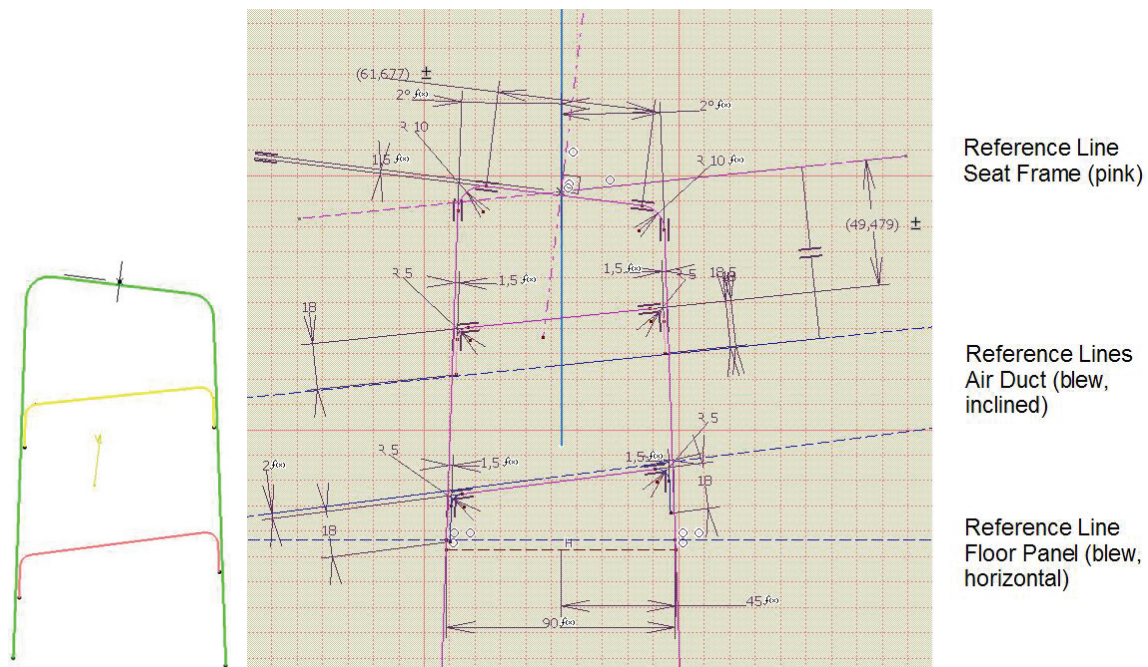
Master section for developing primary prismatic profile surfaces
